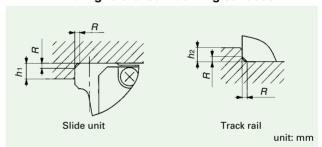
Relieved fillet at the corner of the mating reference mounting surfaces
